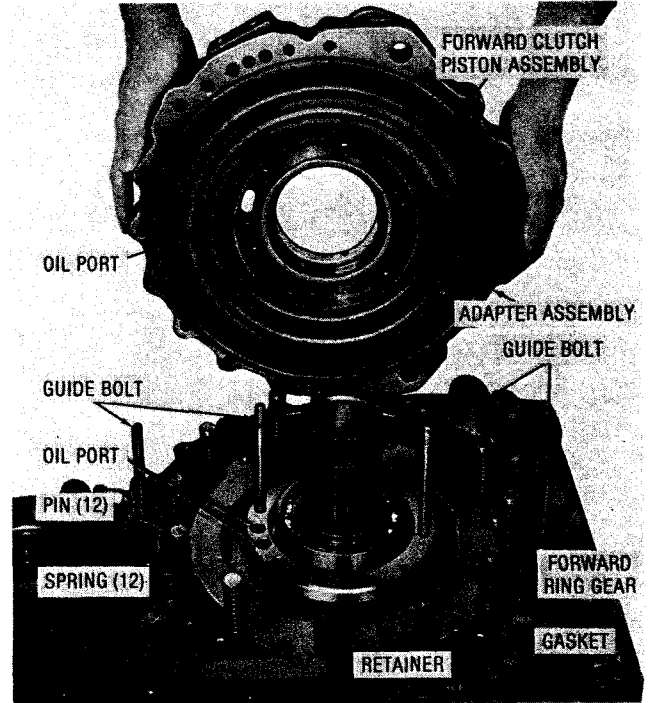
Installing rear housing adapter assembly (TRT-3 underdrive)
